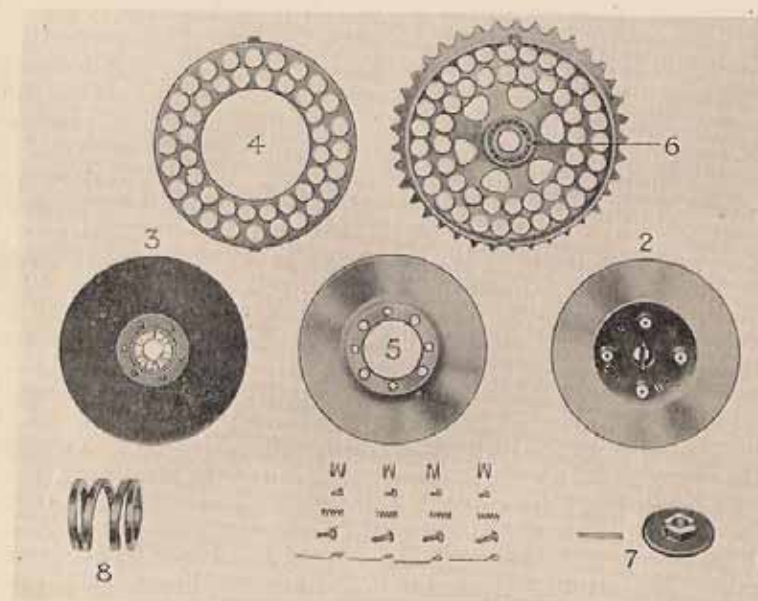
THE 4.98 H.P. AND 7.99 H.P. CLUTCH PARTS
